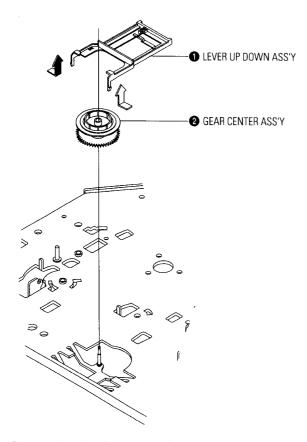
Lever Up Down Ass'y, Gear Center Ass'y Removal
